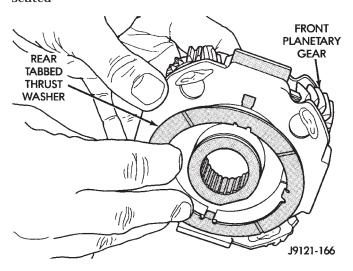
Installing Rear Thrust Washer On Front Planetary Gear
